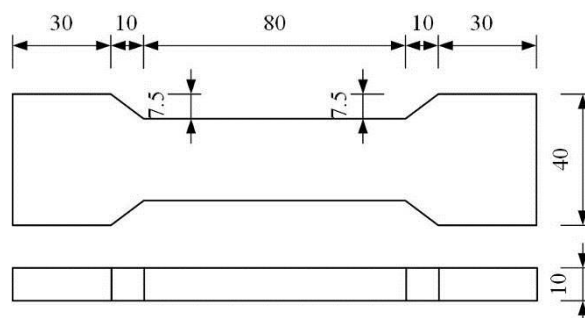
Dimensions of PUC material axial tensile specimen (unit: mm)
